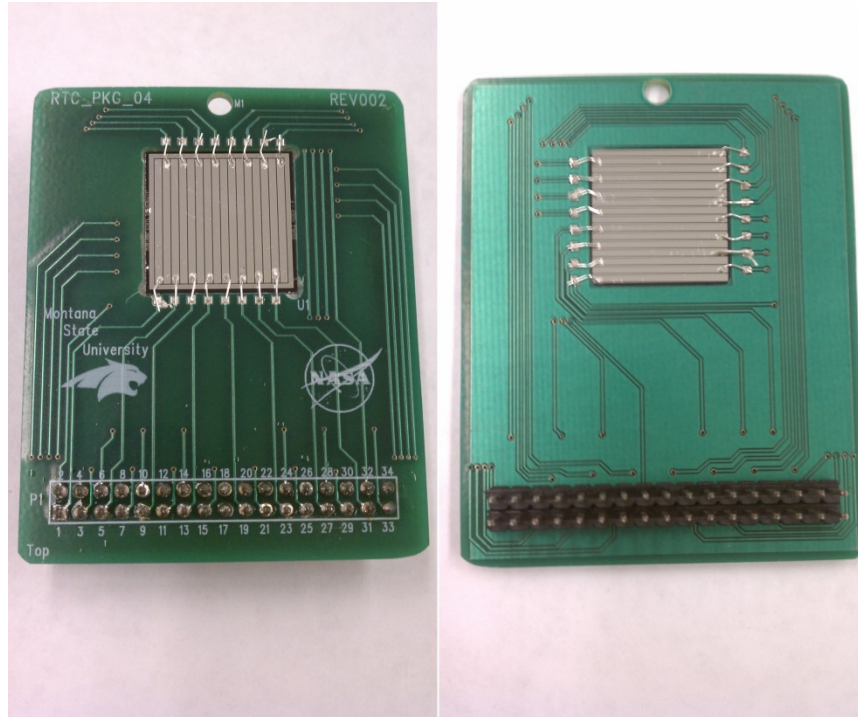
Pictures of the front (left) and back (right) of a packaged completed generation 4 sensor
